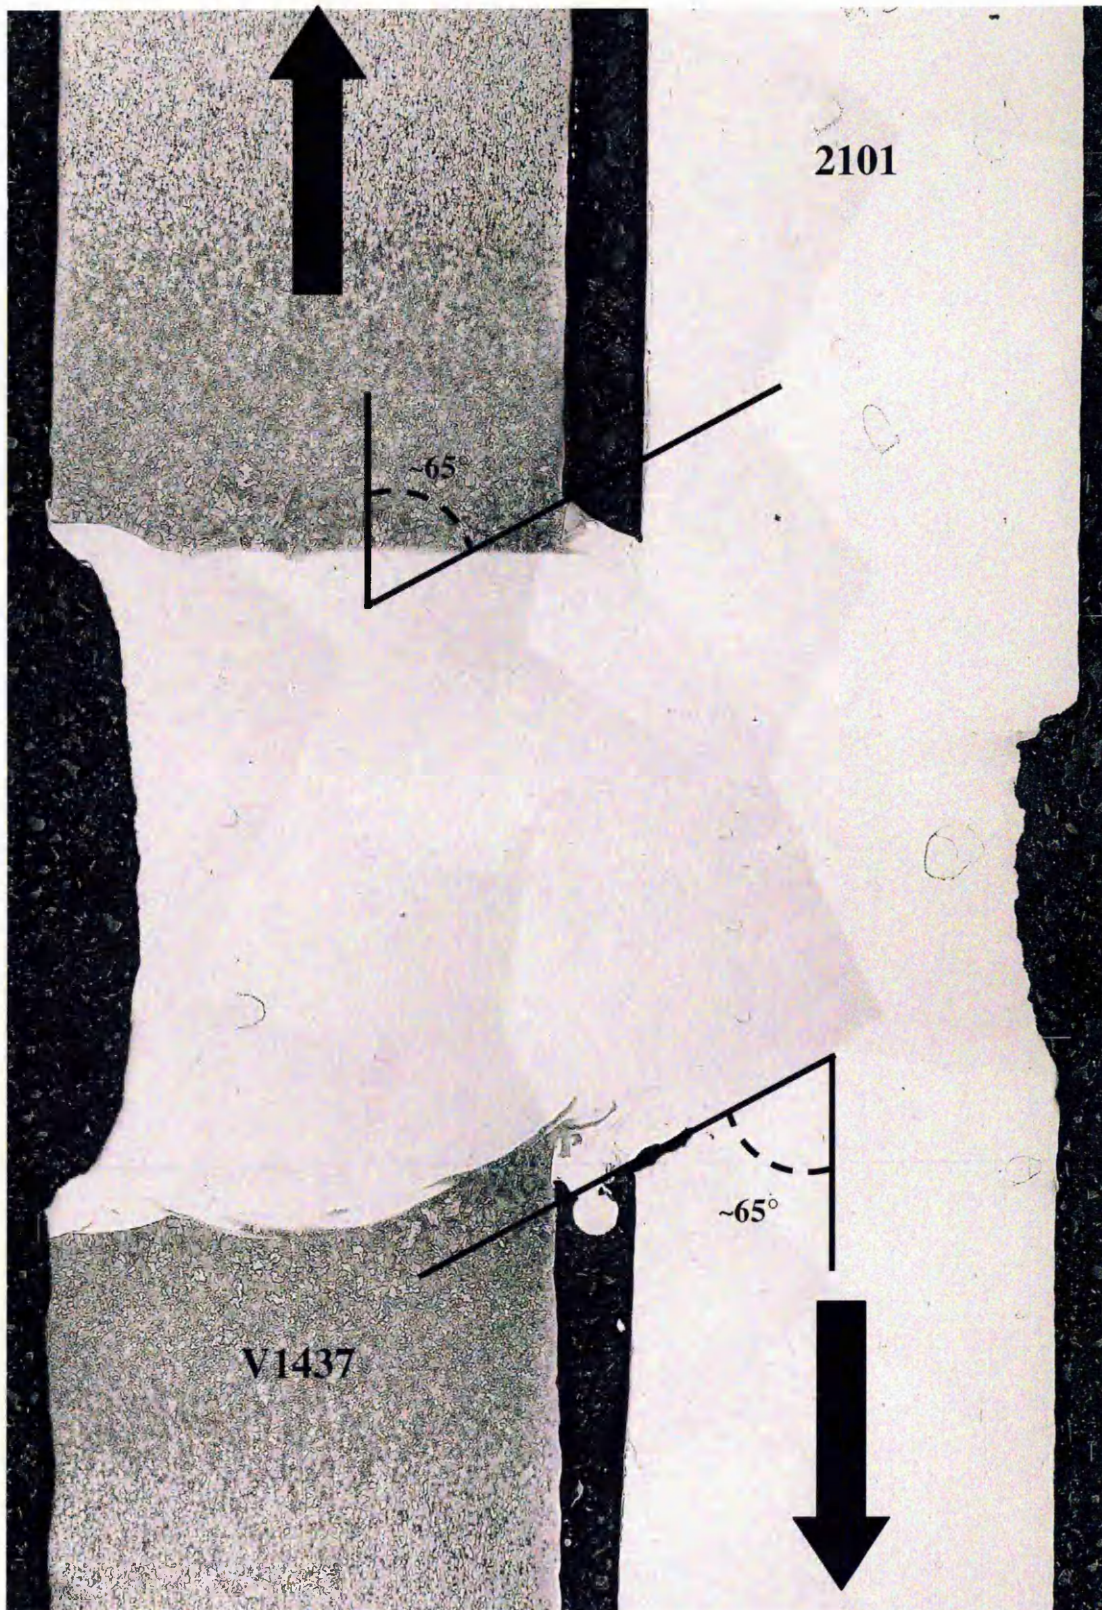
1.2mm V1437(top) – 1mm 2101 dissimilar metal lap joint showing fatigue cracks in both materials
